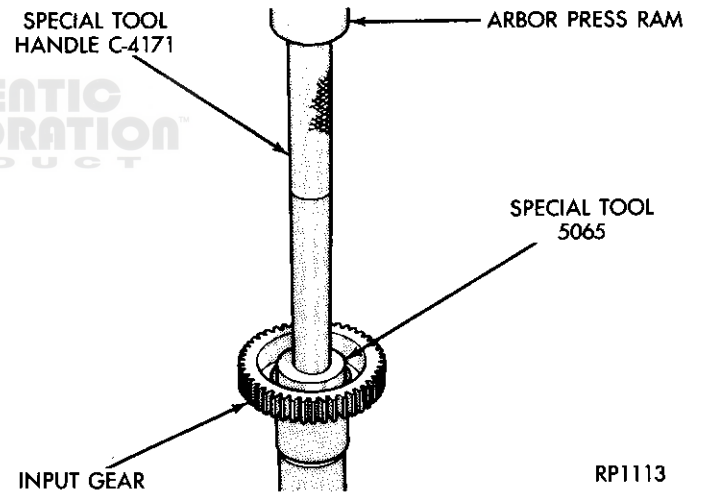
Installing Mainshaft Pilot Bearing In Input Gear
